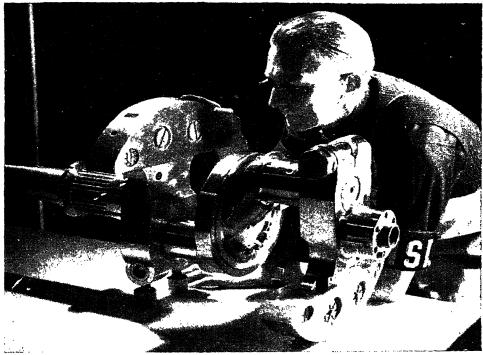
Making the final visual inspection of a double-row crankshaft with a jeweler's glass. This is a crankshaft for a 1,700-hp. engine. (Courtesy of Wright Aeronautical Corp.)
